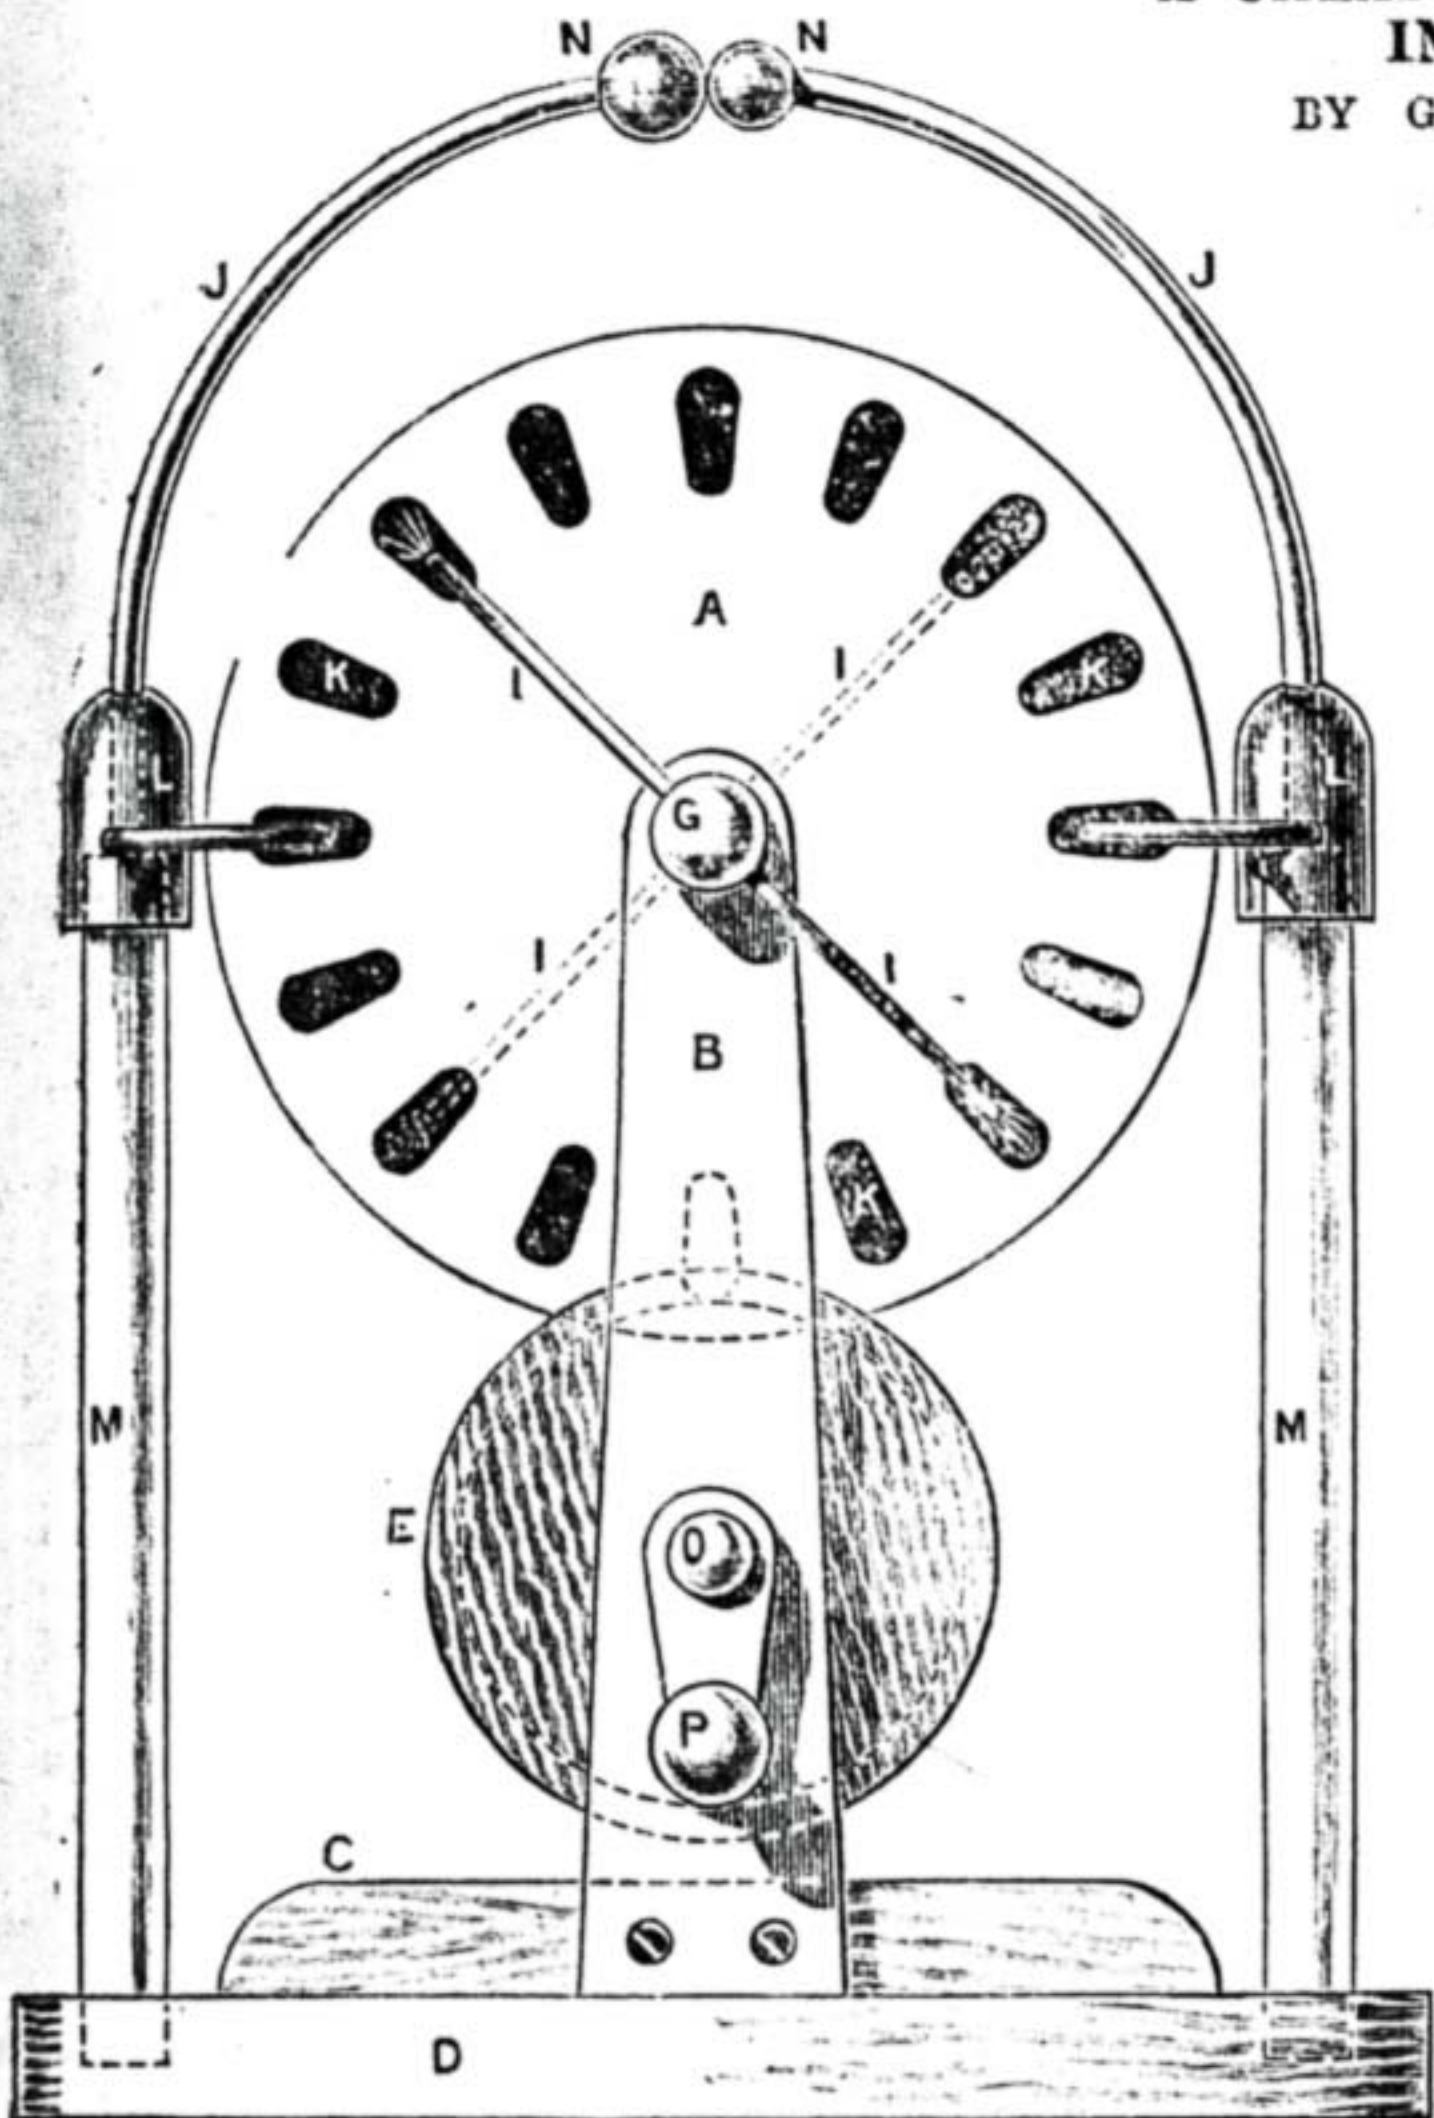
Cheap and Simple Electrical Induction Machine; front view.
